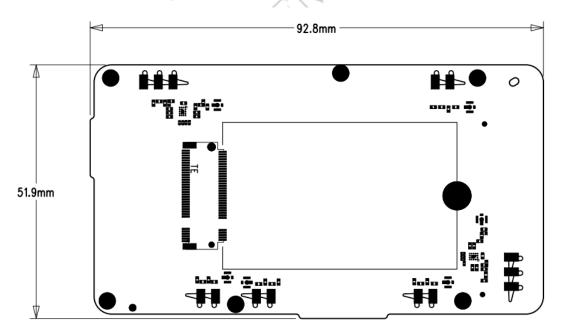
5G S-Module All-in-one Type-M PCB Size
